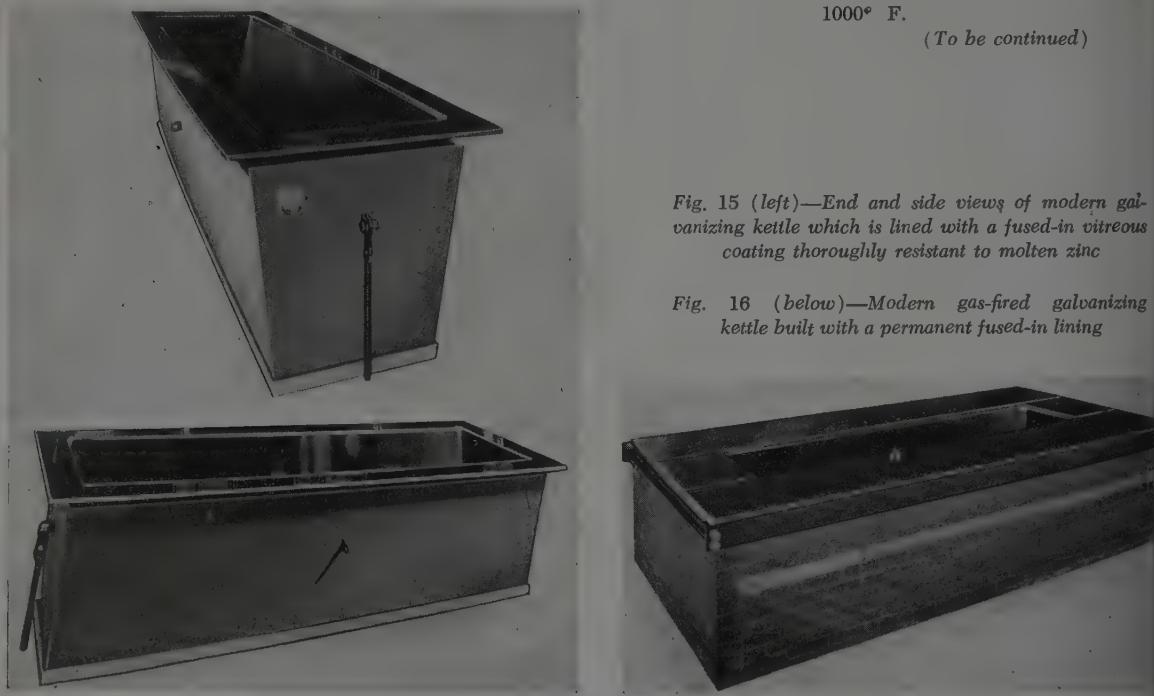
(left)—End and side views of modern galvanizing kettle which is lined with a fused-in vitreous coating thoroughly resistant to molten zinc
